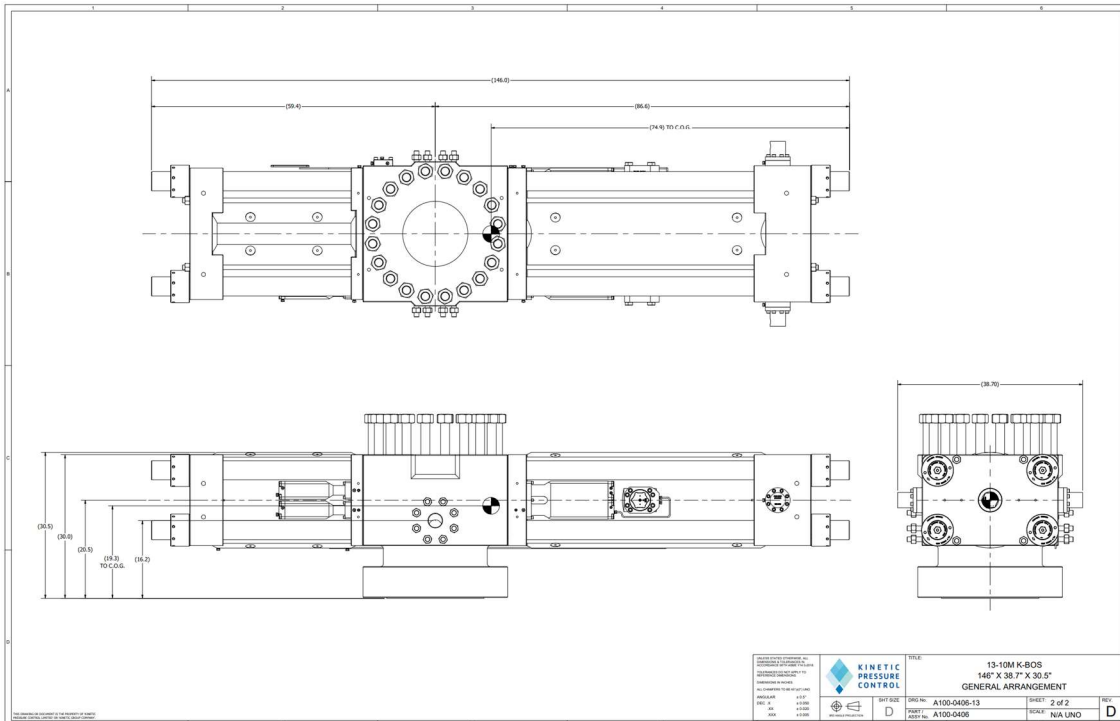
Dimensions of the 13 $\frac{3}{8}$ " 10M K-BOS with Flange bottom x Studded top
